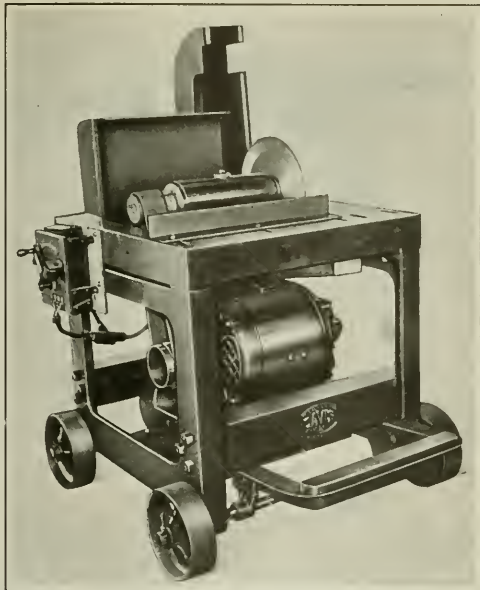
Motor-driven Tube-cutting Machine having an Oscillating Head
